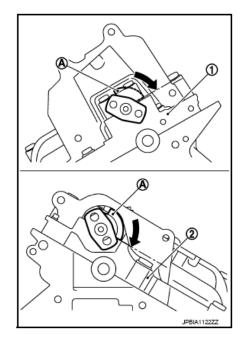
Identifying Actuator Motor Mounting Bolts Courtesy of NISSAN NORTH AMERICA, INC.
